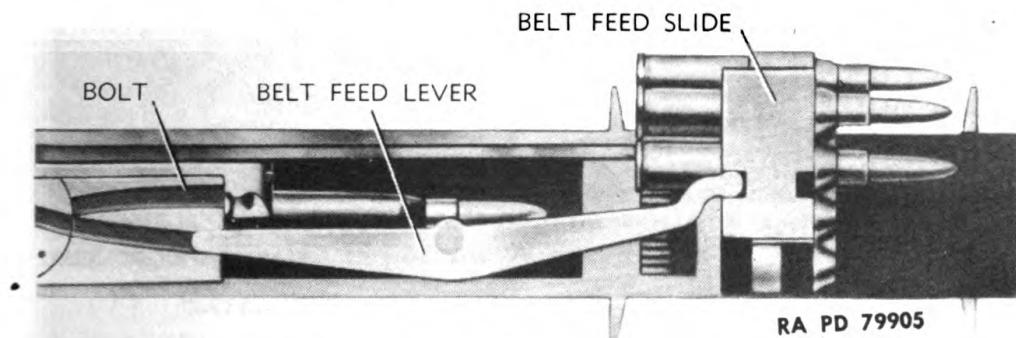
Top View of Belt Feed Mechanism—Bolt in Forward Position
